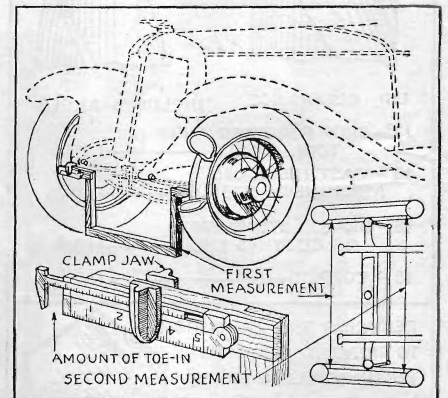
By clamping a slide caliper to end of a U-shaped wooden frame, you have a gage that can be used to test the toe-in of front wheels
